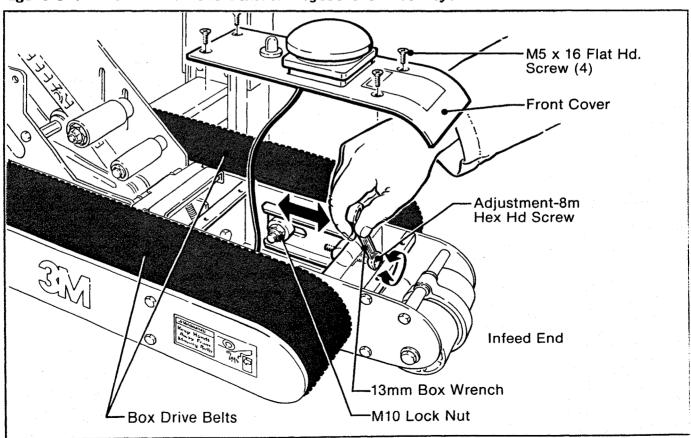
Box Drive Belt Tension Adjustment - Upper Drive Assembly
